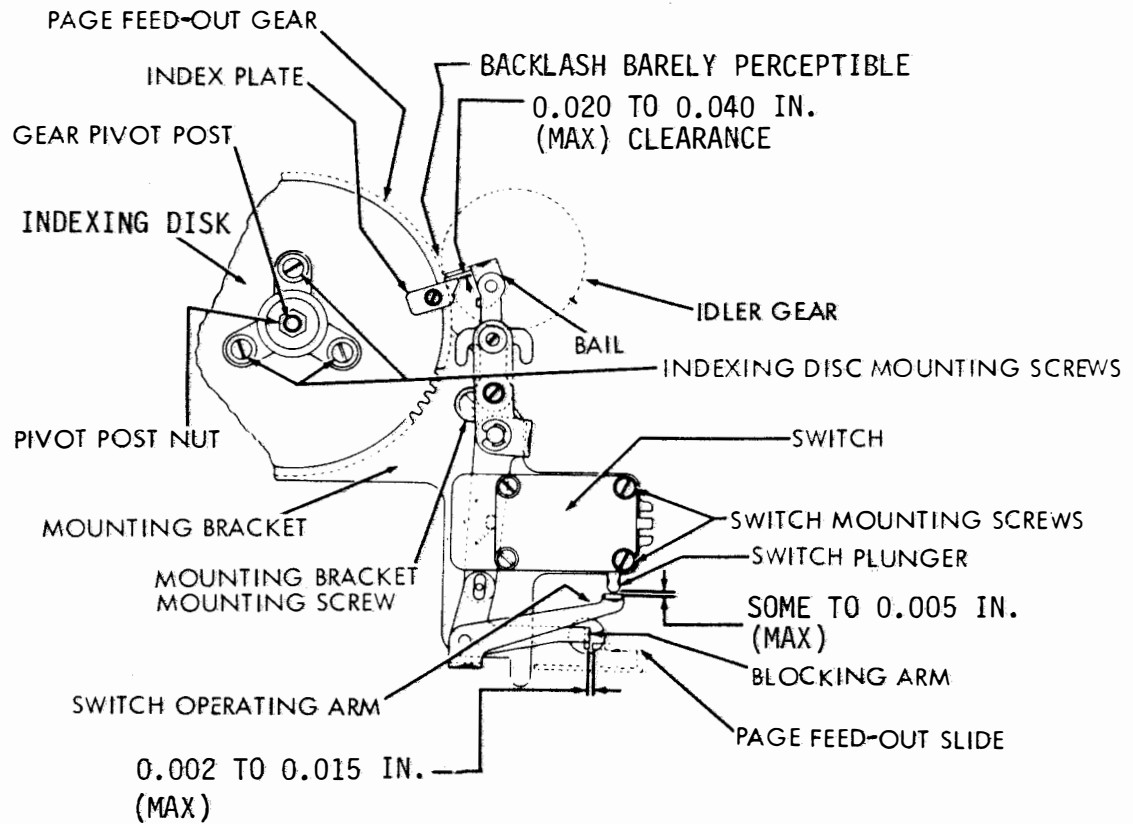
Page Feed-Out Gear Play, Mounting Bracket, Indexing Disk, and Switch Operating Arm (Transmitter Control), Left Side View
